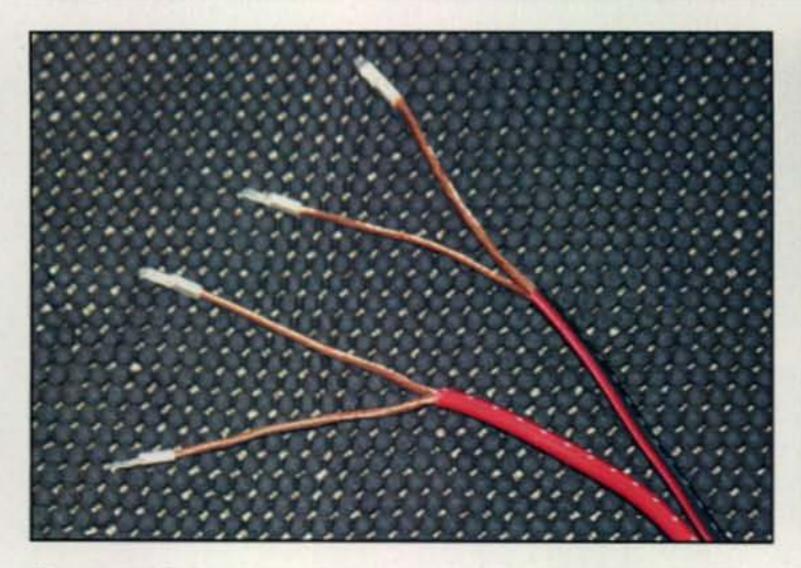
Strip about six inches of insulation from the thick wires, and make each wire into two smaller wires by separating the strands.
